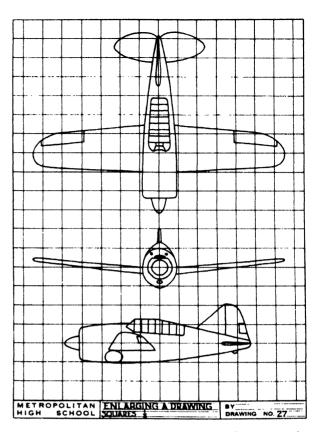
ENLARGING A DRAWING (PROBLEM)
